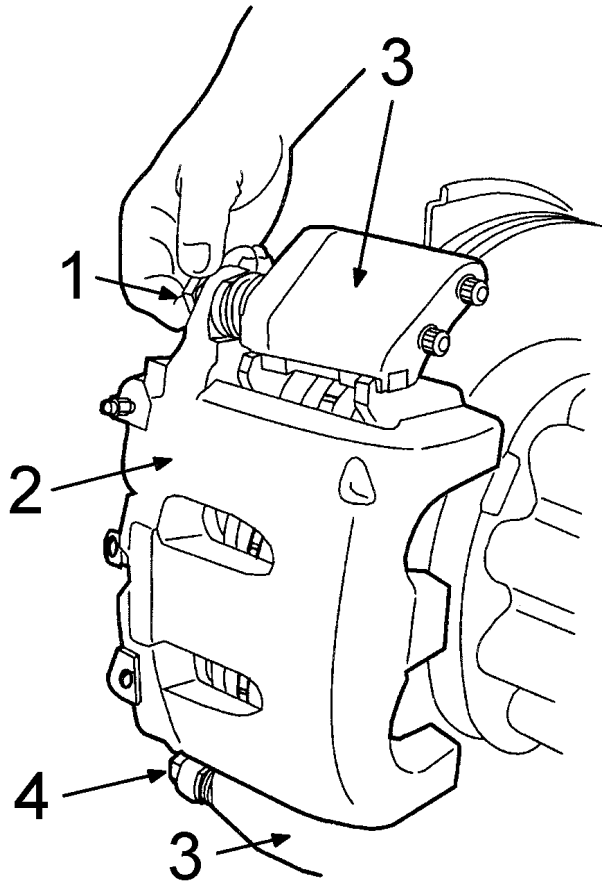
Remove Upper Hex Mounting Bolt to Lower and Remove Caliper
